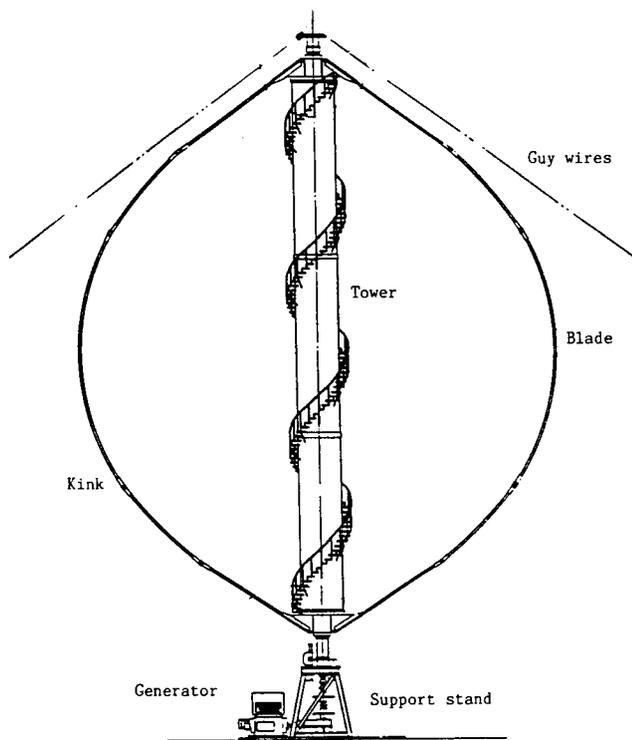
Drawing of 34-m vertical-axis wind turbine, Bushland, TX.
